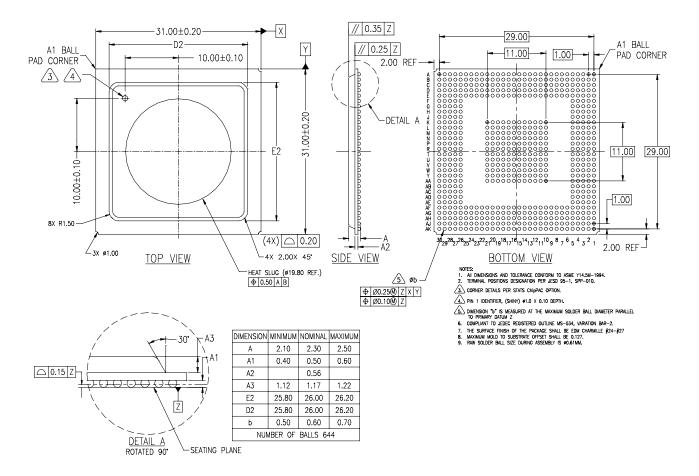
PEX 8524BB/BC 644-Ball PBGA Mechanical Dimensions
